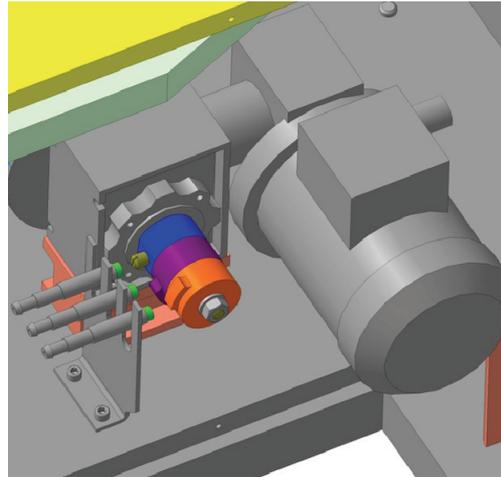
3D view of a controller model with cams and inductive non-contact sensors of the technological complex for friction welding
